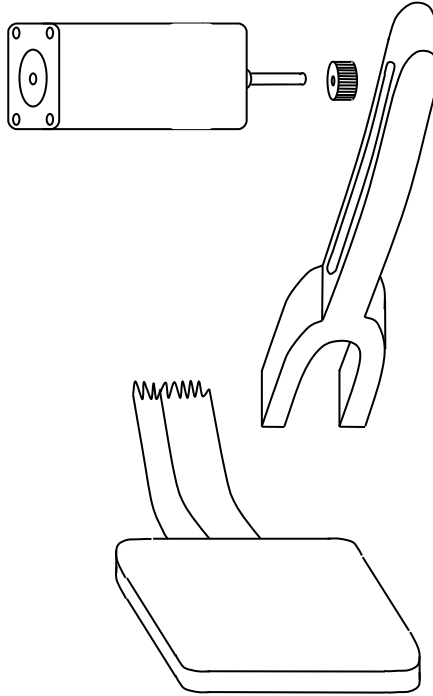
Automatic braking control mechanism – pedal, rack lever, pinion and motor.
